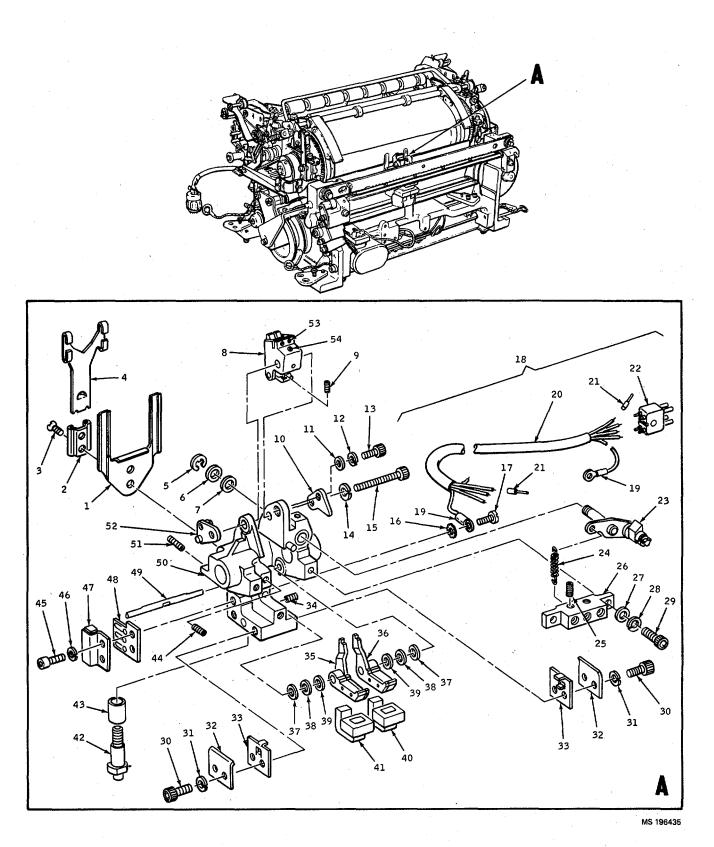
Carriage Assembly, Exploded View (Sheet 2 of 2)
